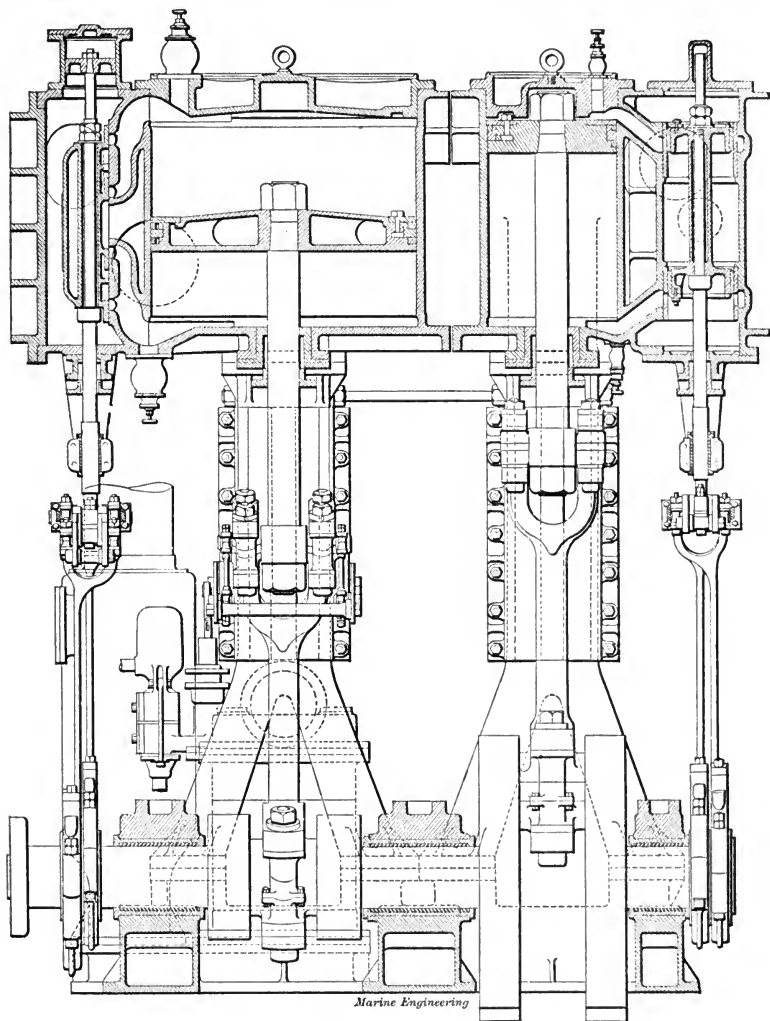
Longitudinal Section, Compound Engine, Mercantile Type.
